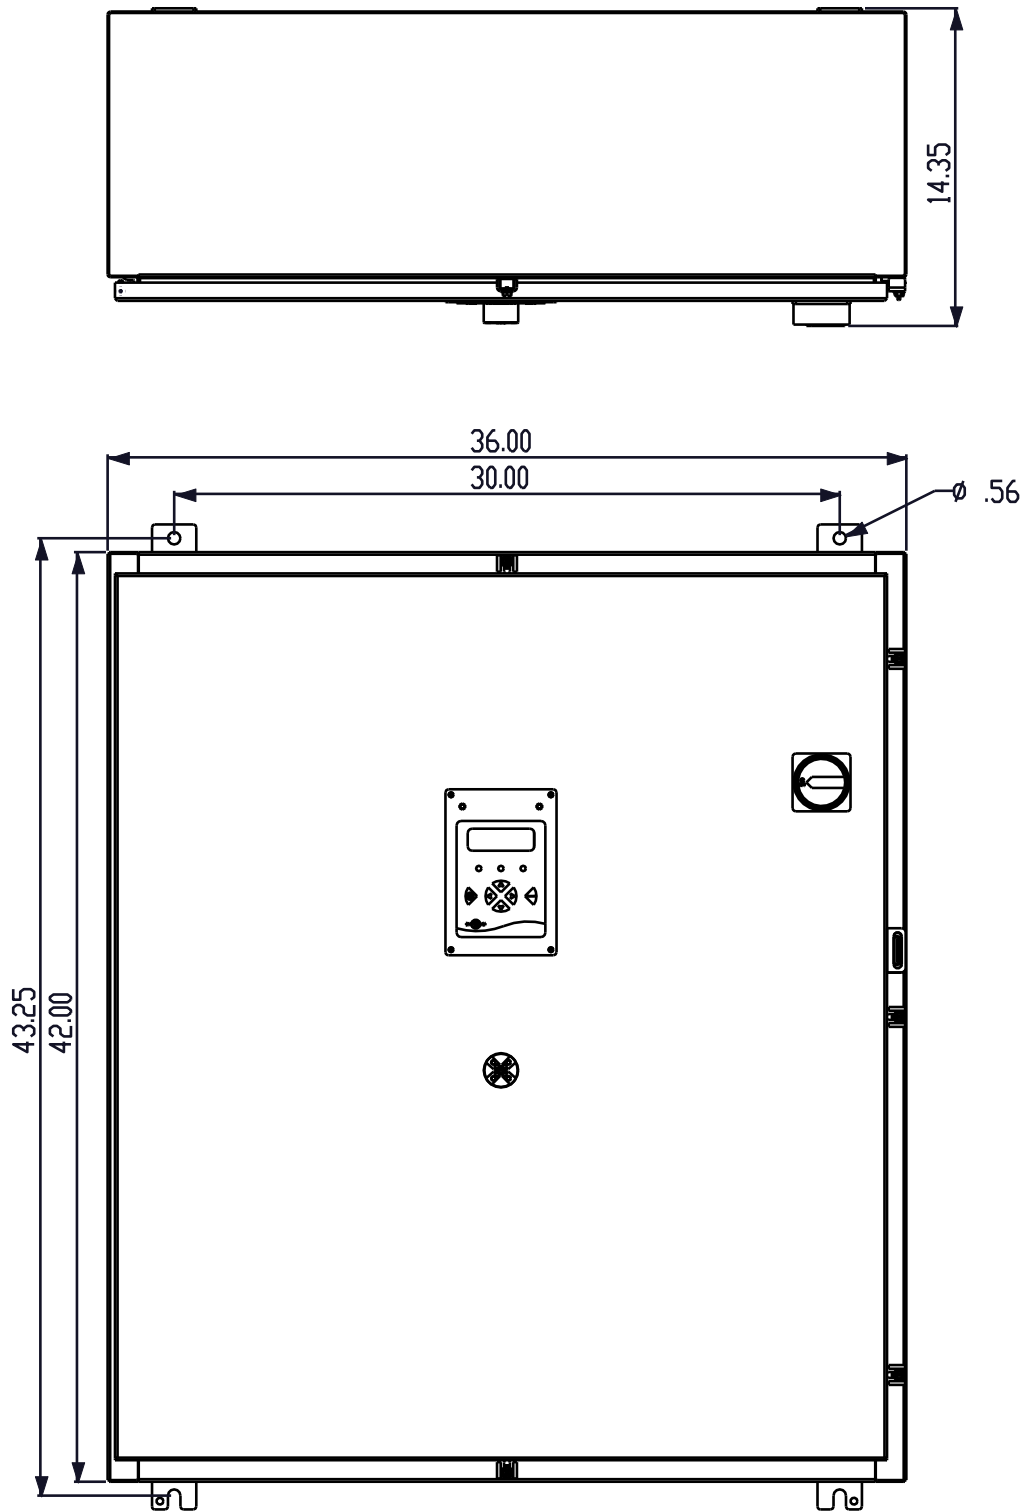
S3534CR E66 Enclosure Dimensional Outline
